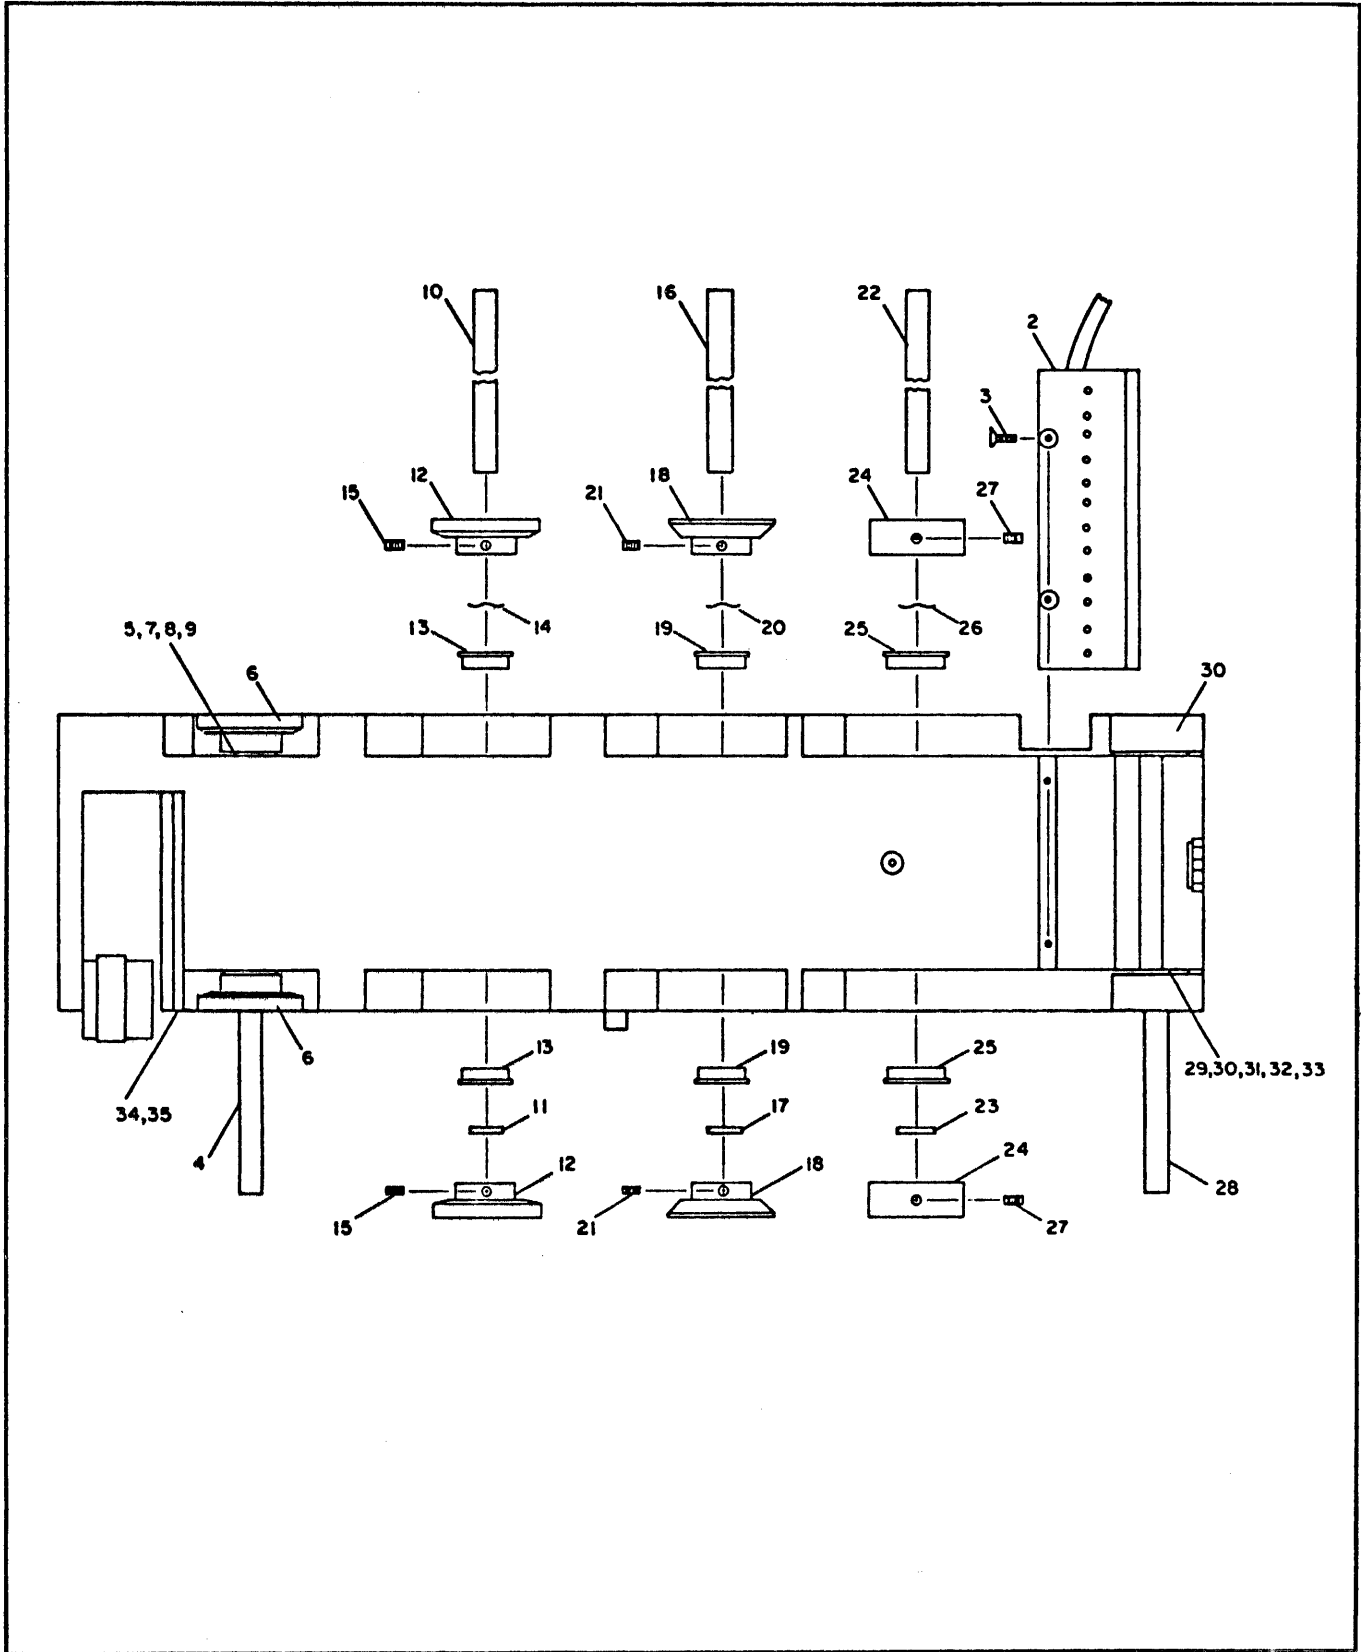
STACK SUPPORT ASSEMBLY (sheet 1 of 2)
